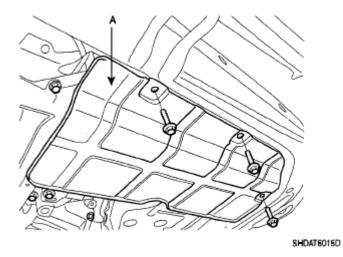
Identifying Under Shield Cover (1 Of 2)
